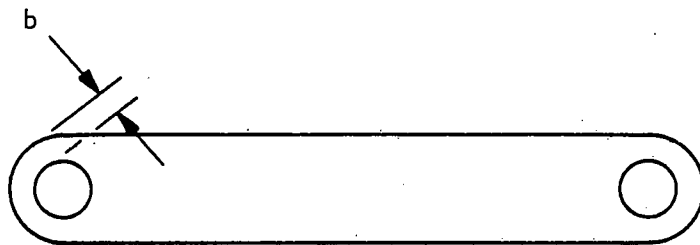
Die Should Be Designed So b Will be Within Drawing Requirements After Deburring
